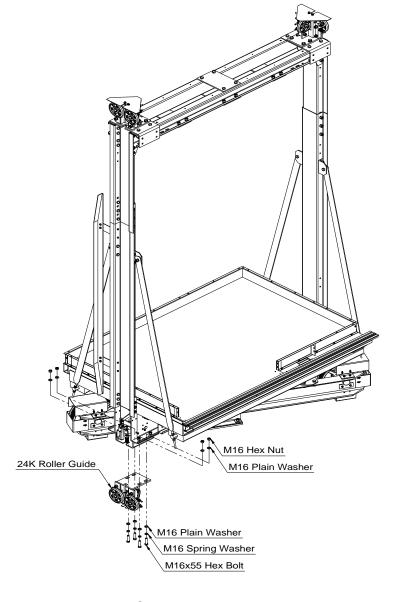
BOTTOM GUIDE ROLLER INSTALLATION
